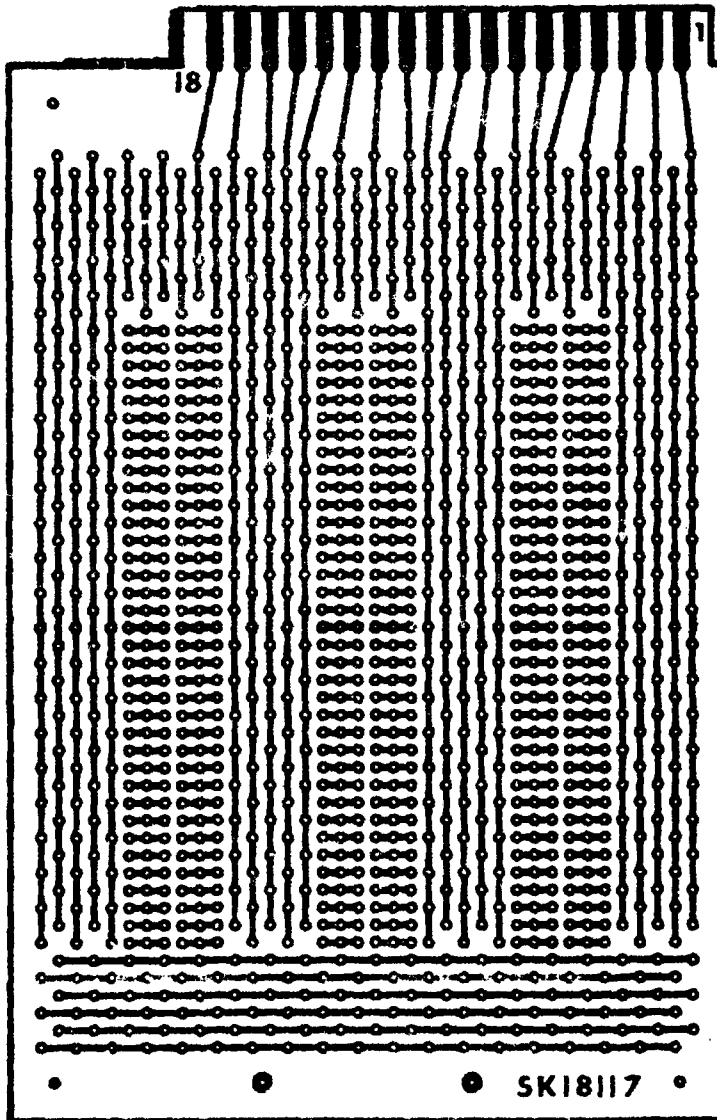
GENERAL PURPOSE PRINTED CIRCUIT BOARD
